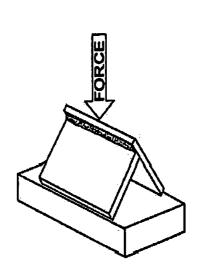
Rupturing Fillet Weld Test Plate
